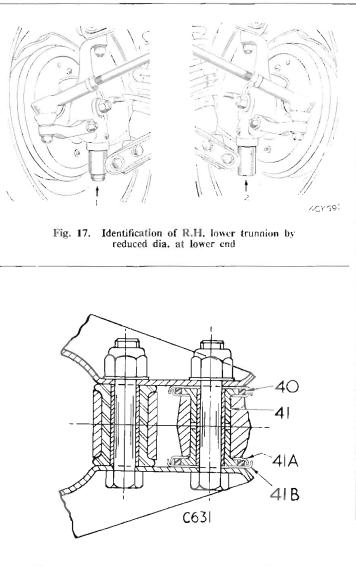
Cross section of lower wisbbone attachments to lower trunnion and damper/spring unit
